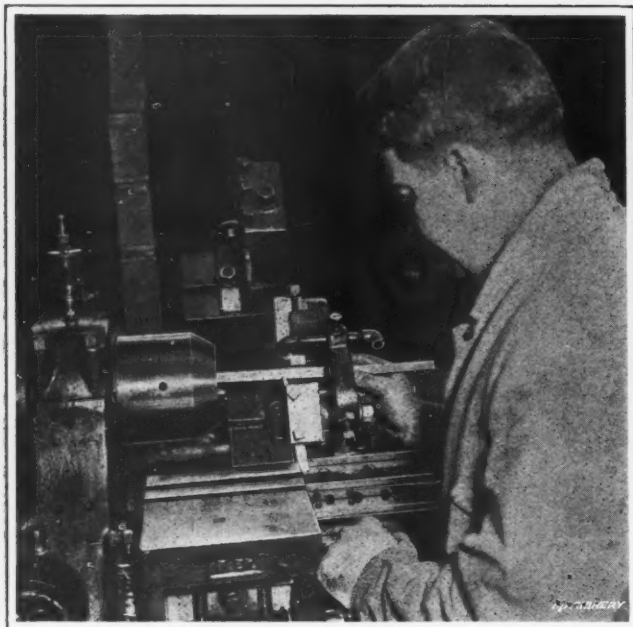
Setting Turning Tool Relative to Spindle Nose
